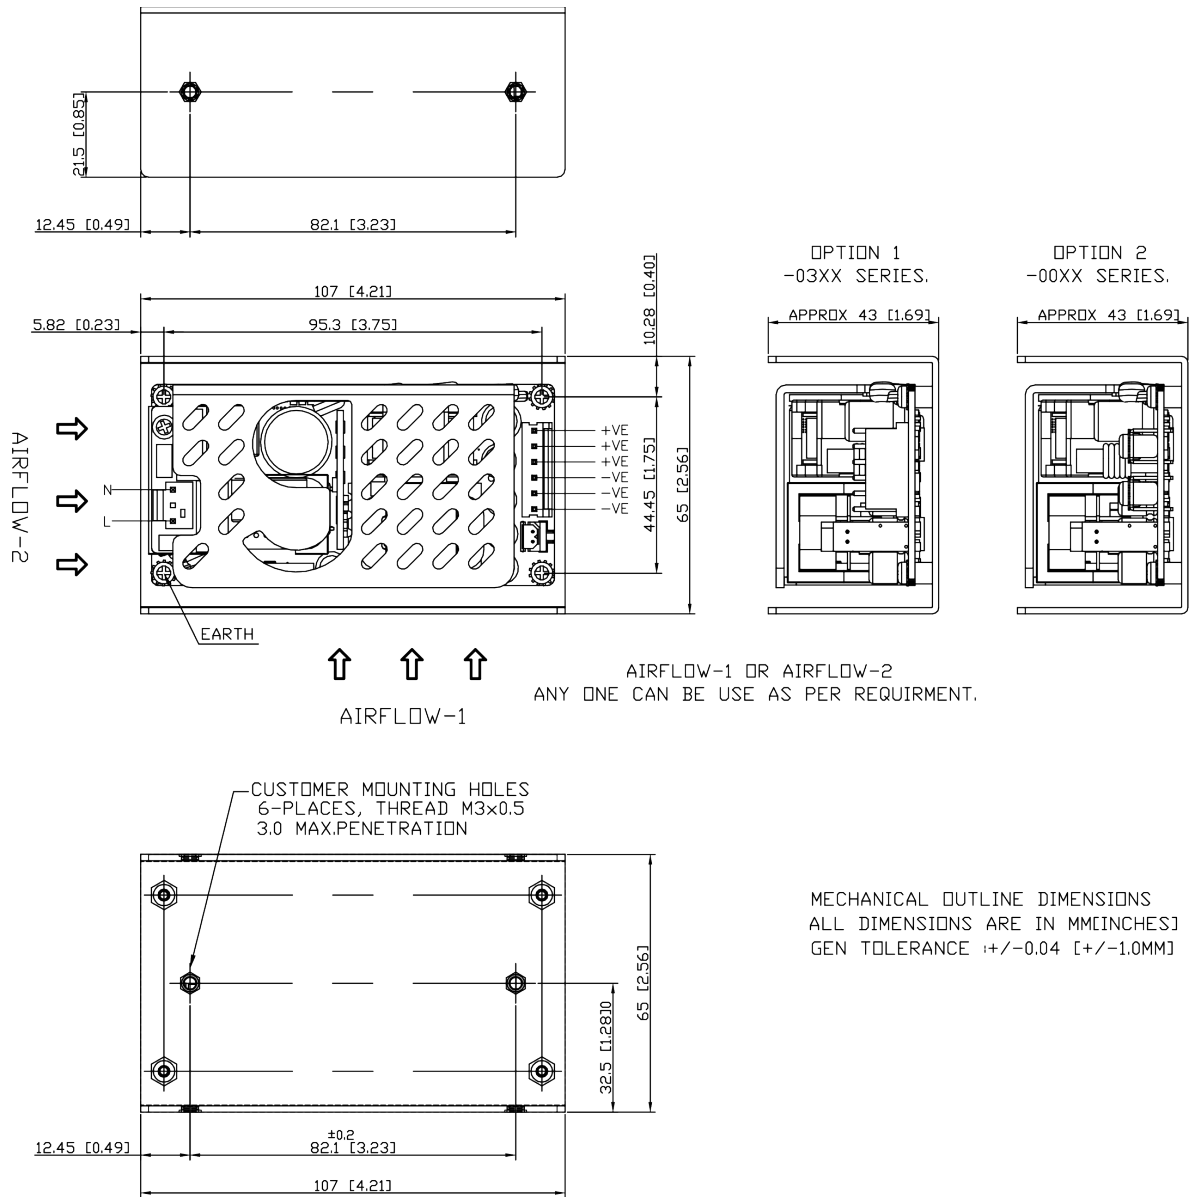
Mechanical Drawing – EPG300-0XXX-U
